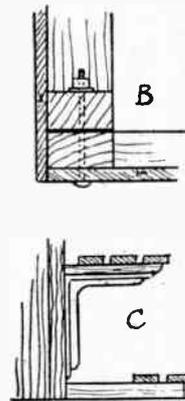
Details of the way the frames are joined, and the seat arrangement
